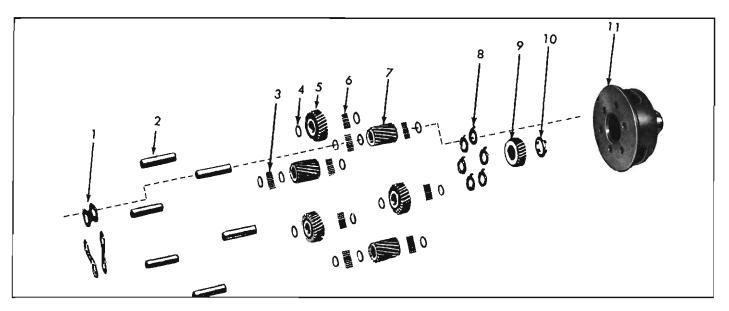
E-2—Planet Carrier Assembly—Exploded View
